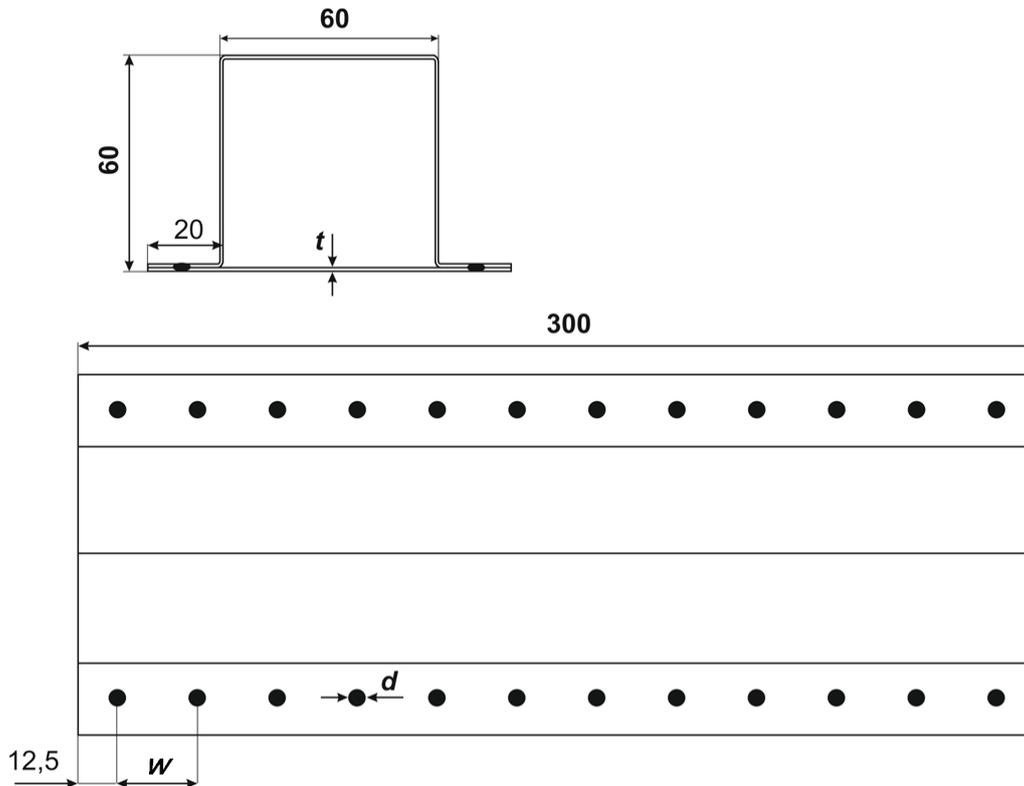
The base dimensions of the top-hat profile cross sections: t - thickness, w - spot weld pitch distance, d - spot weld diameter
